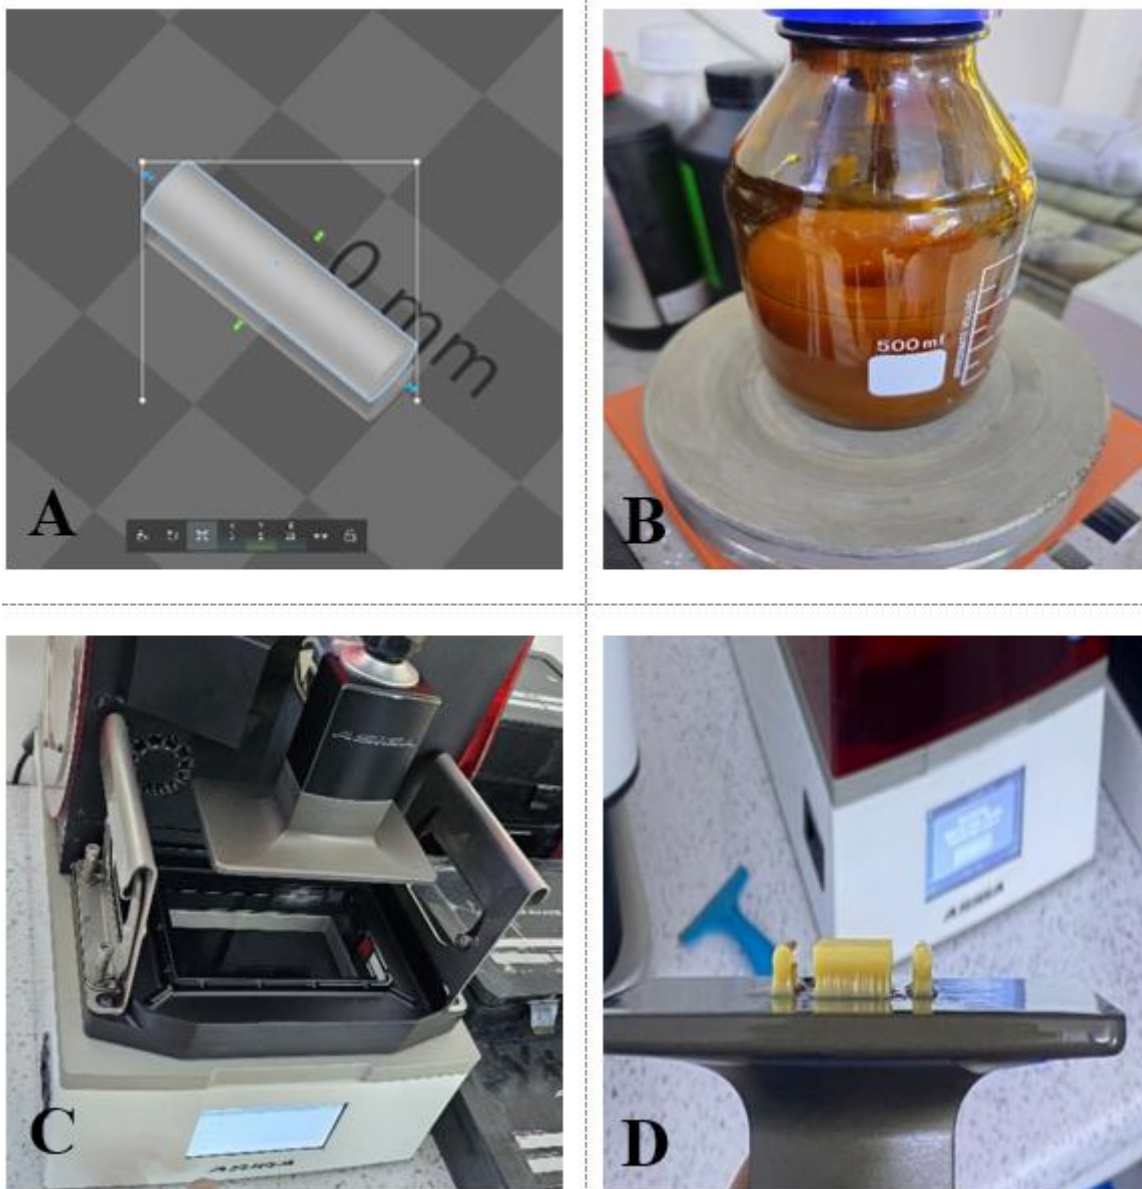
A. Dimensions for the coefficient of thermal expansion sample. B. 3D printed resin liquid stirring by magnetic stirrer. C. Asiga printer. D. samples on the platform after complete printing.
